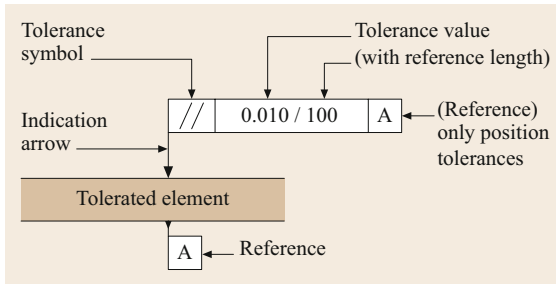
The tolerance frame as a drawing entry
